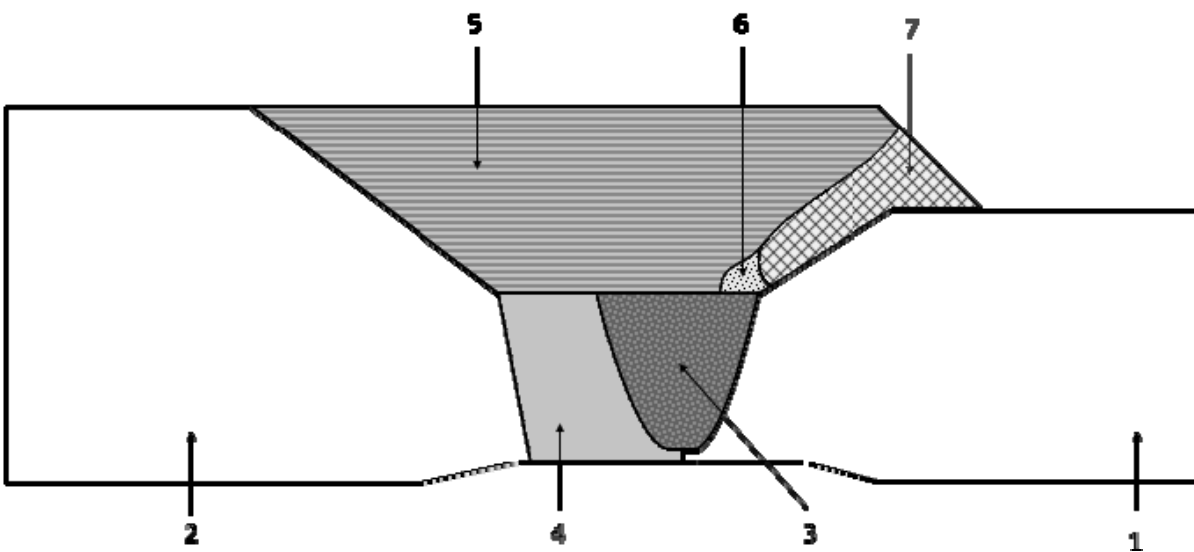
WELD OVERLAY OF ISI WELD 24-10-130 (90° AND 270°)
